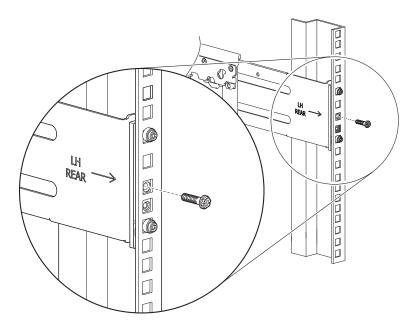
Attachment of rear mount bracket to rear rack cabinet posts
